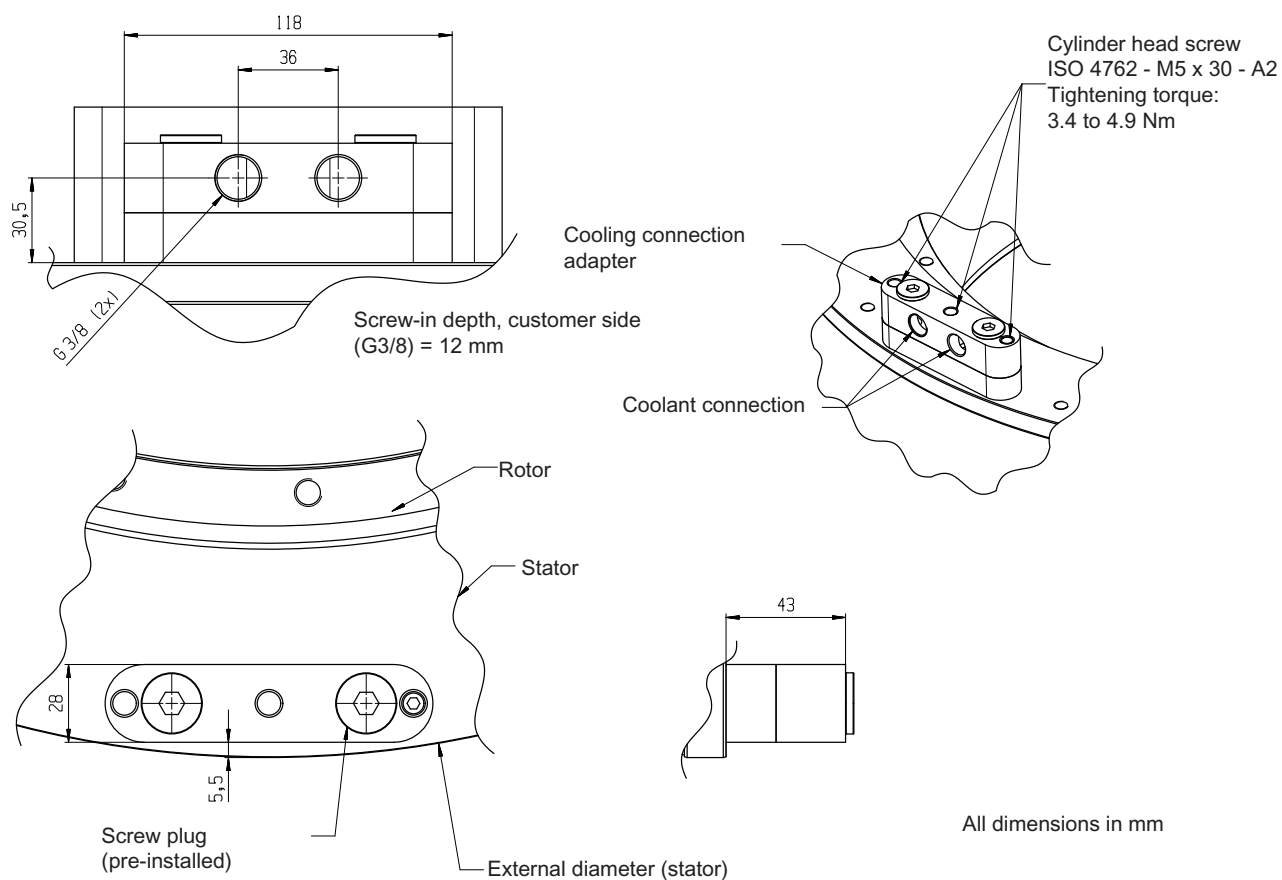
Outer radial cooler connection with cooling connection adapter (option) for 1FW629
